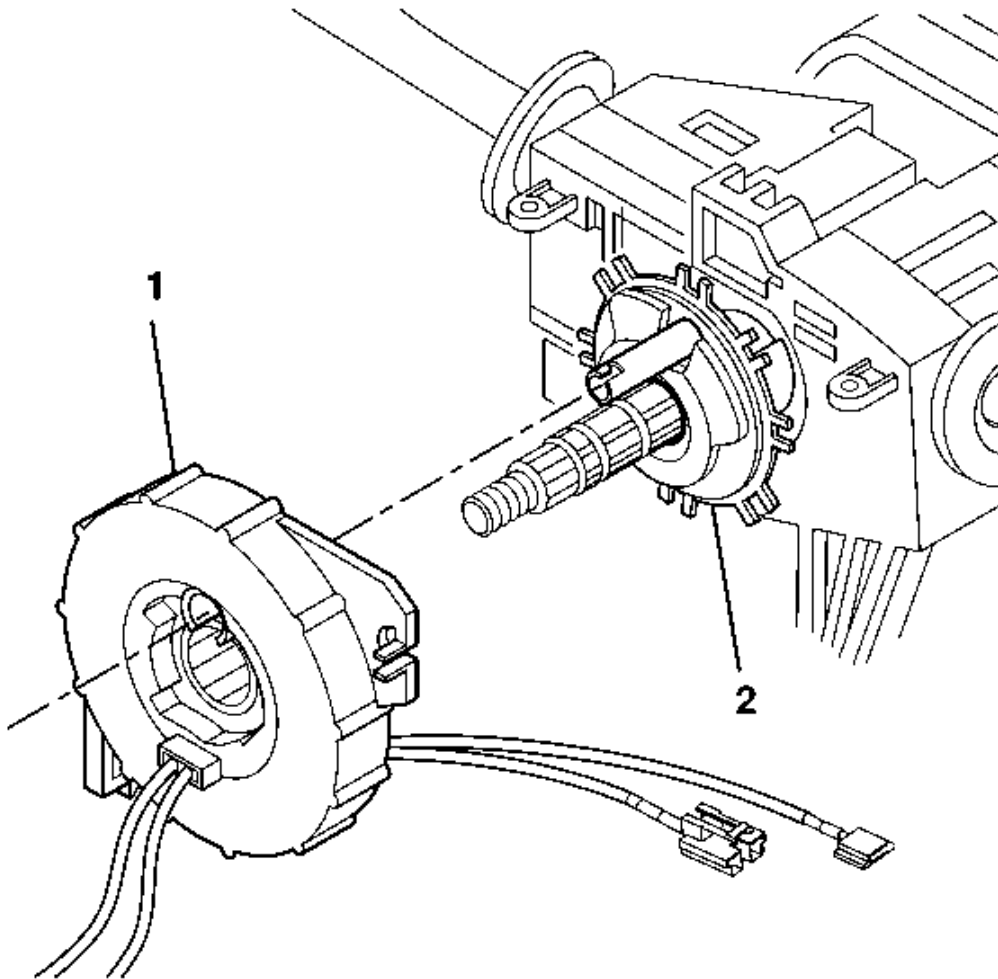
Aligning SIR Coil Assembly With Horn Tower
